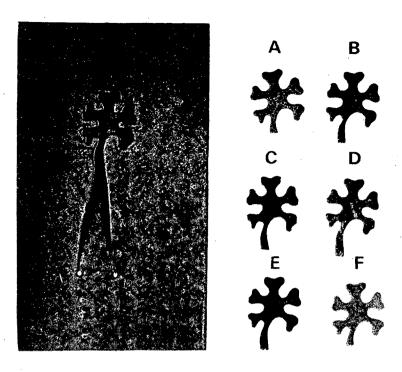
Mild steel tool with blanks cut in turn from A paper, B silver, C brass, D aluminium, E mild steel and F paper.
